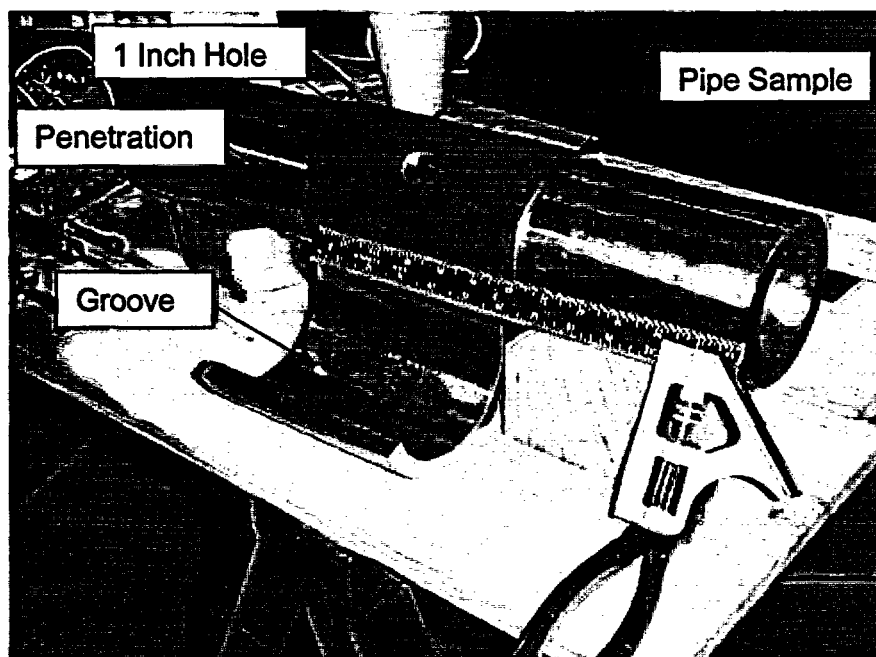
The tube sample with the through wall holes mounted on the penetration tube. In front is the groove Sample SK-WB08-04.
